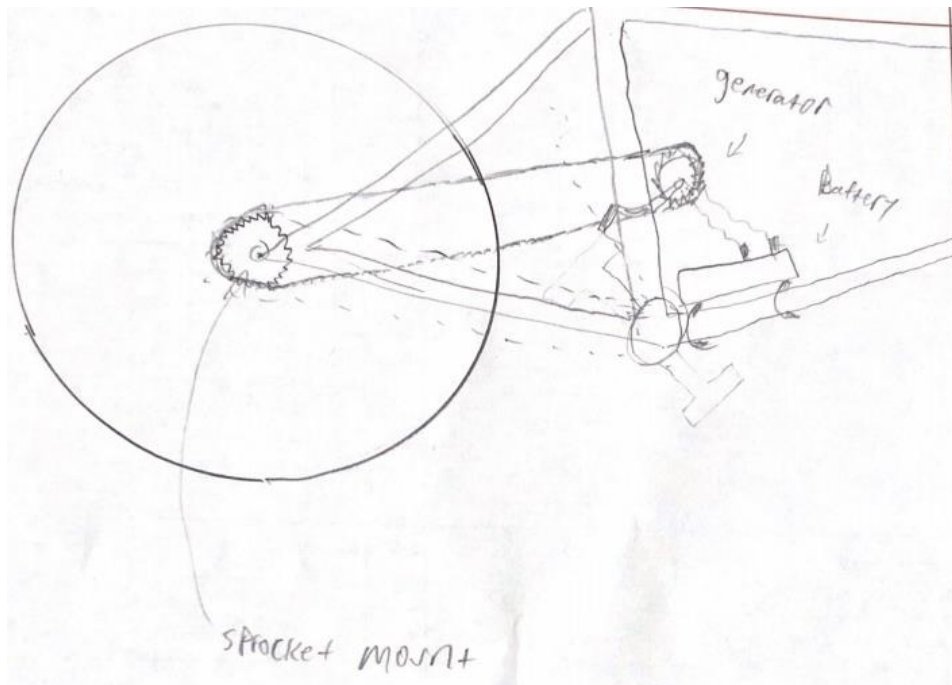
Simple Model of V8 Sprocket Mounted Gear
